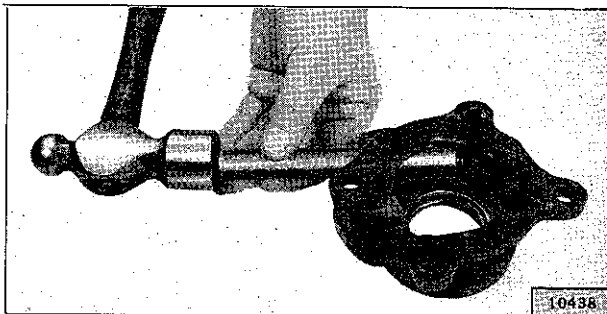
SPEEDOMETER PINION BUSHING DRIVER
